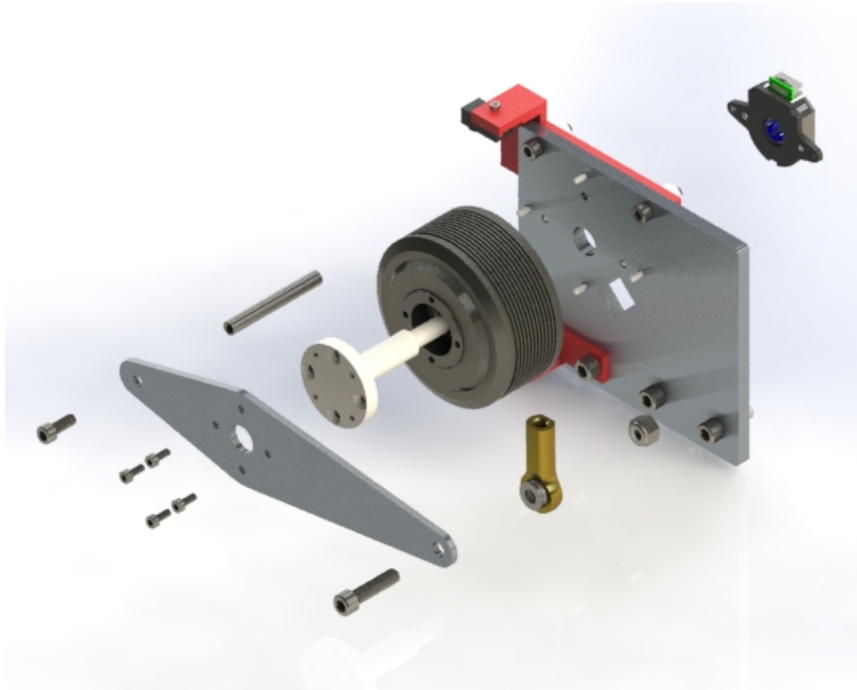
CAD Render of ODrive Mounting Bracket.
